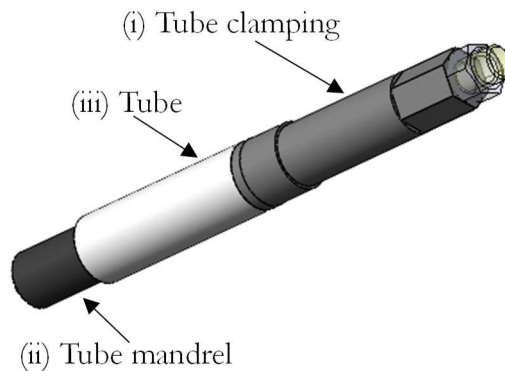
Rotational part: (i) tube clamping; (ii) tube mandrel; (iii) tube.
